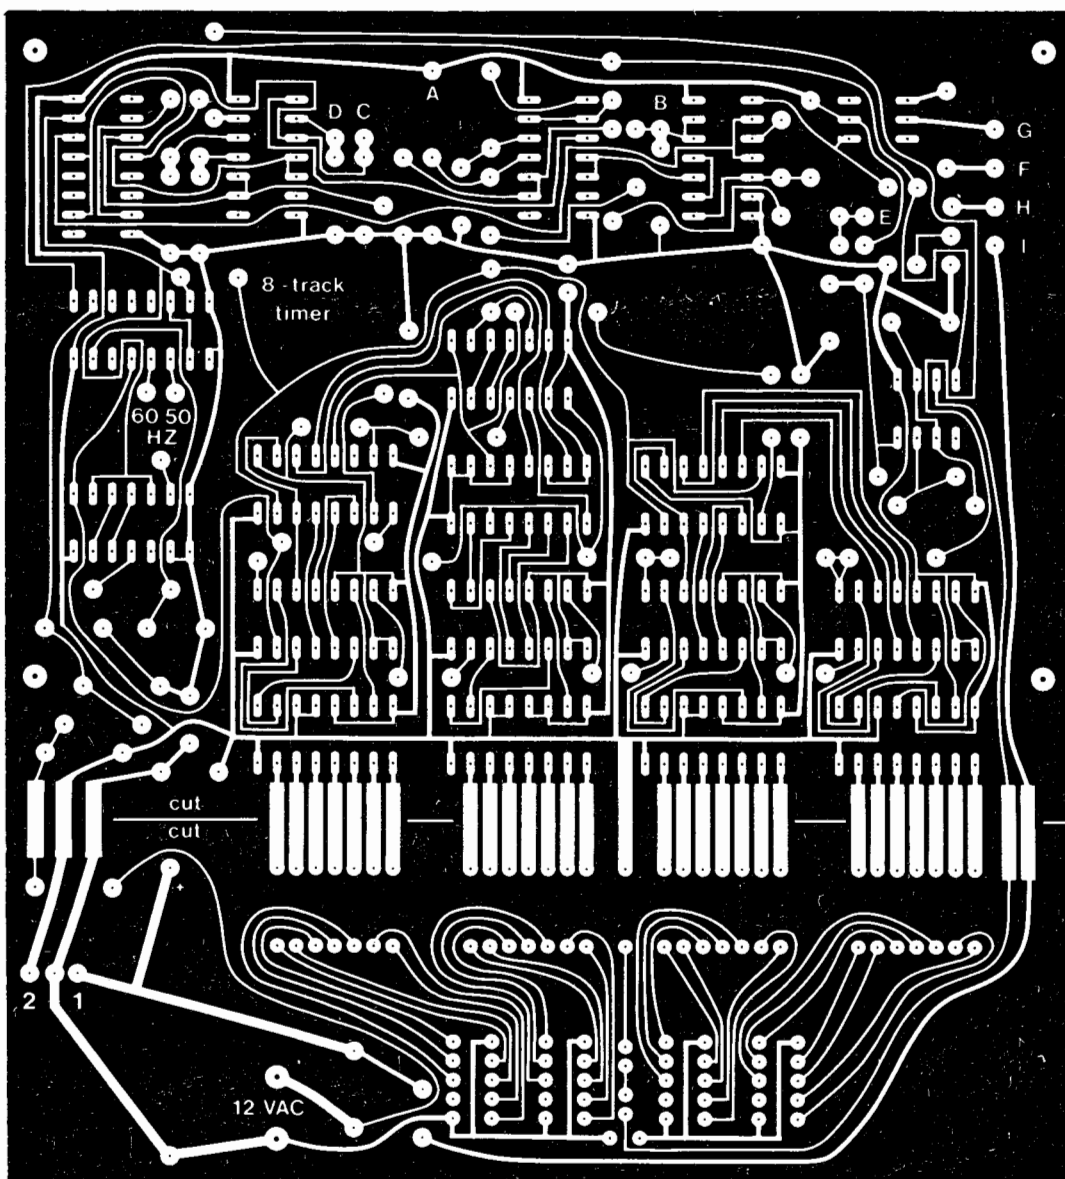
Actual-size foil pattern for the 8TT's single pc board.
